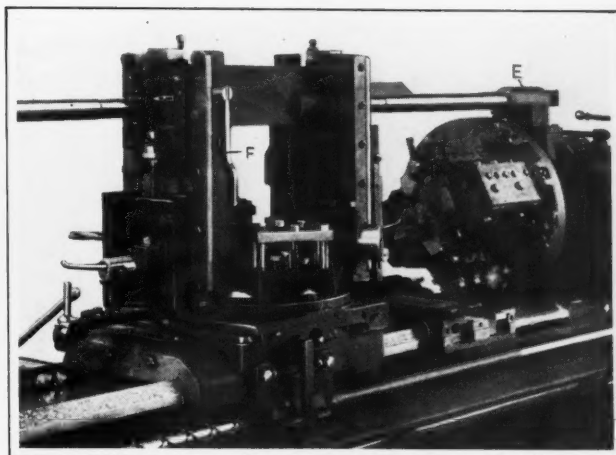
Close-up View of the First-operation Indexing Fixture and the Tooling
